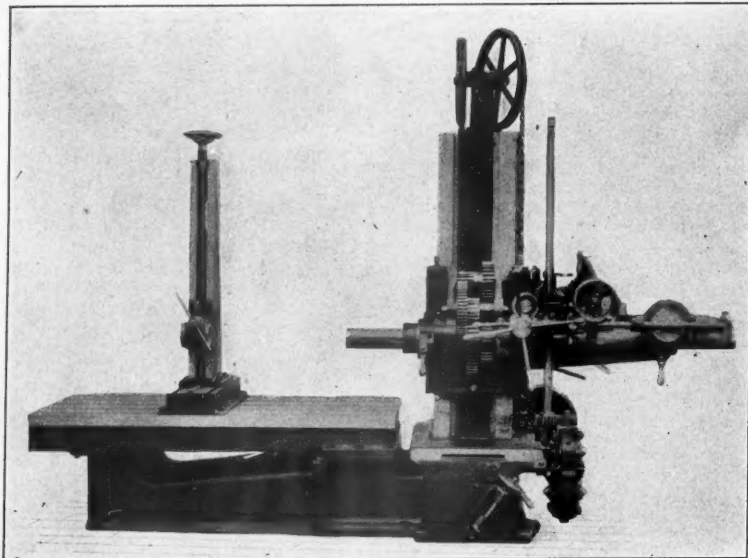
The Fosdick Horizontal Boring and Milling Machine.
